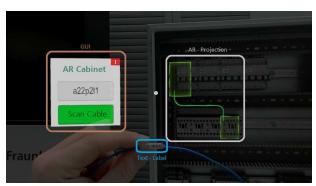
View through the HoloLens after recognizing a text-label on a cable
